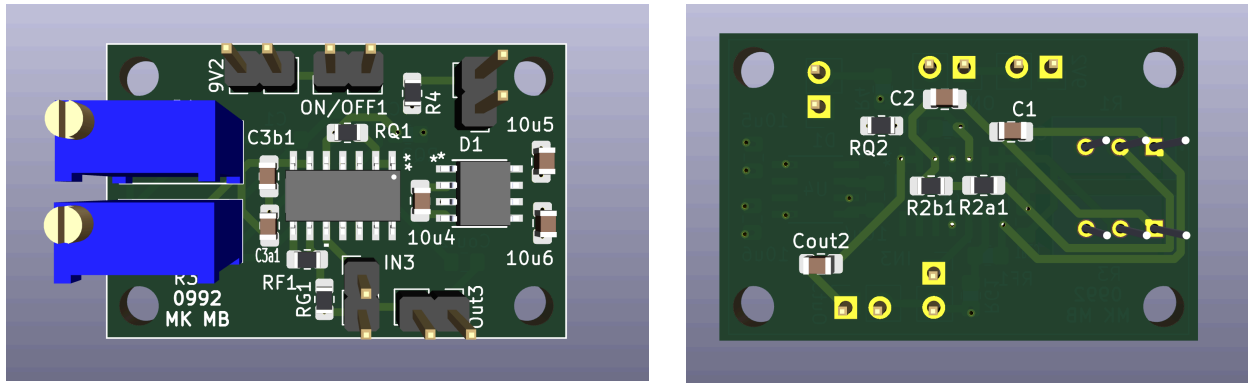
The digital 3D PCB model shows the component placement and board layout of the front and back before fabrication.
